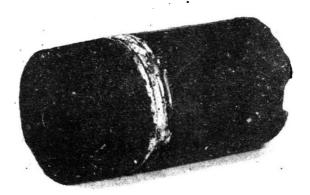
Pipeline corrosion failure at threaded joint. (Metropolitan Refining Co., Inc.)
